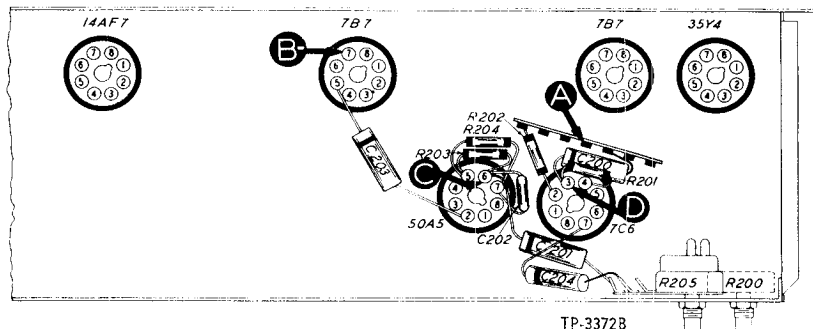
BOTTOM VIEW, SHOWING SECTION 2 TEST POINTS.
